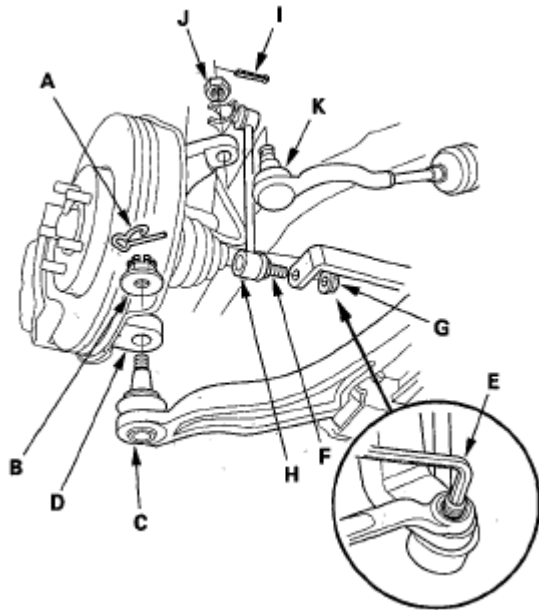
Identifying Lock Pins, Castle Nuts, Tie-Rod End Ball Joints And Stabilizer Link
